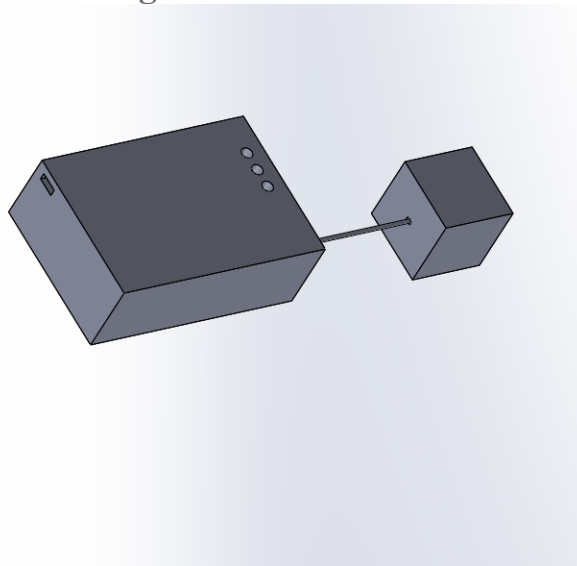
Troubleshooting Device SolidWorks Drawing
